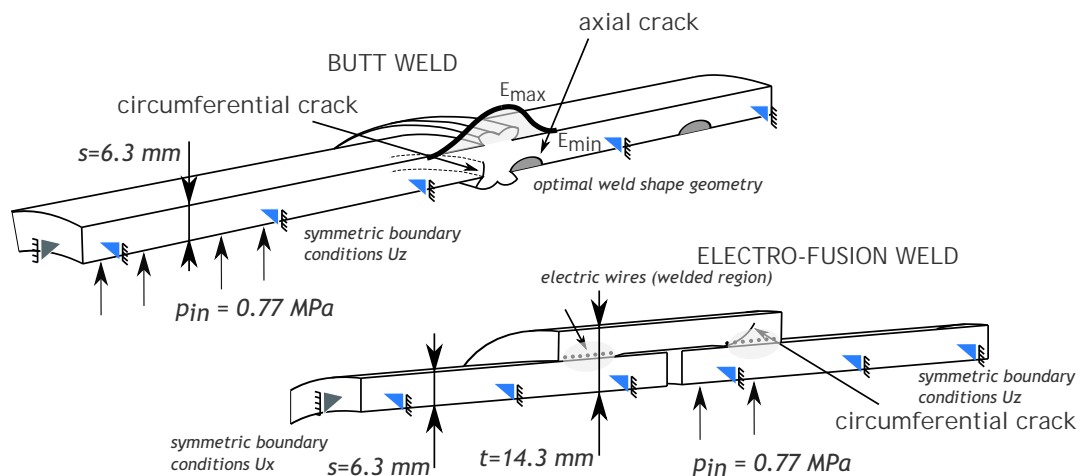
Geometry of welded pipes showing the butt or electro-fusion welding connection
